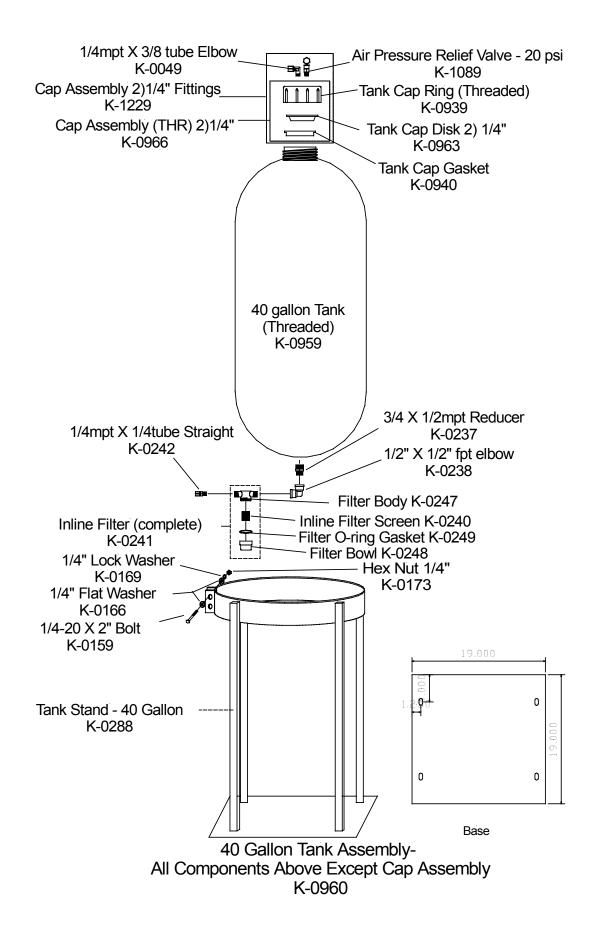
Trac Master 40 Gallon Tank Assembly
